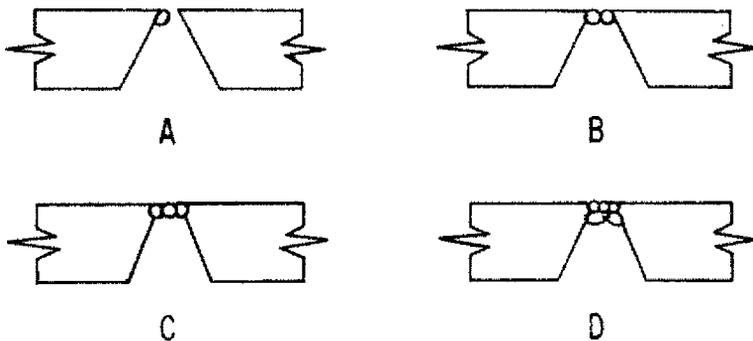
Bridging a wide root opening by depositing a series of nuggets.
